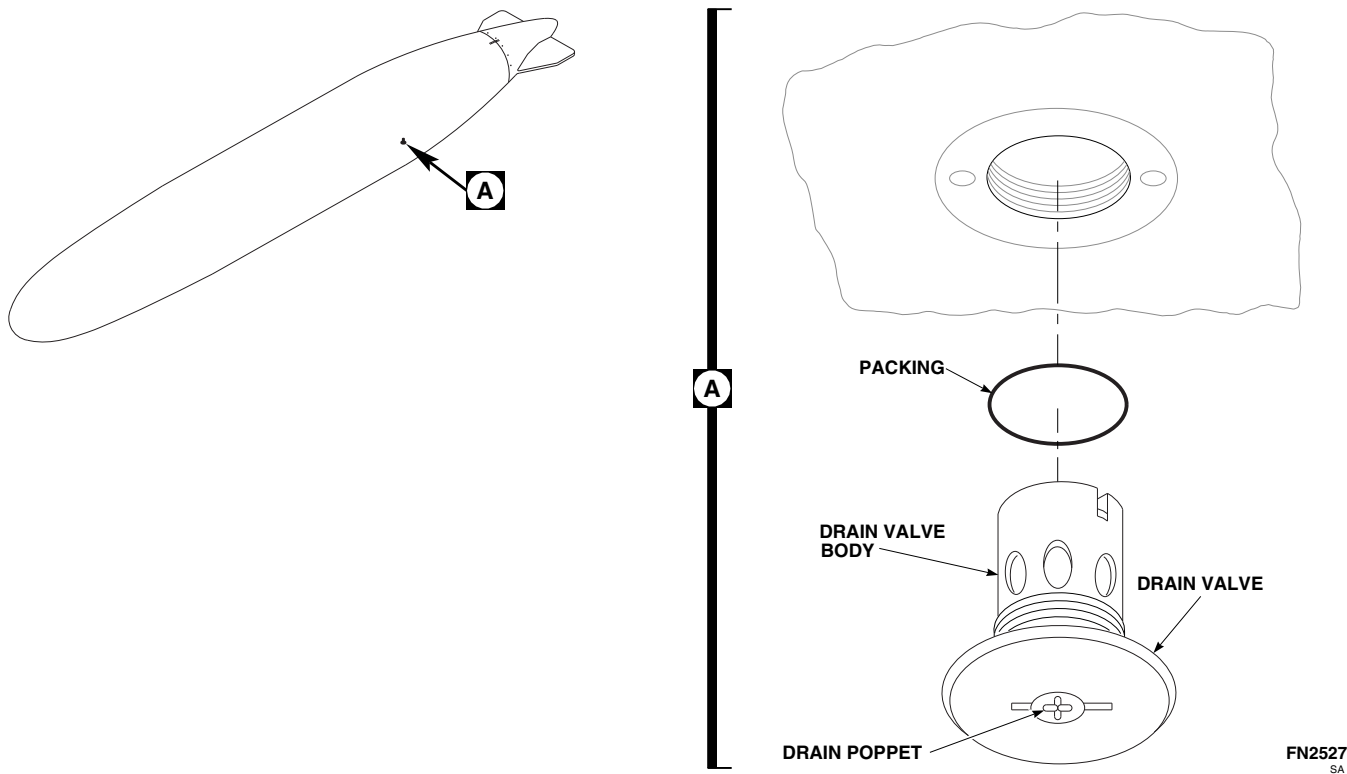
REPLACE ESSS EXTERNAL 230 GALLON FUEL TANK DRAIN VALVE
